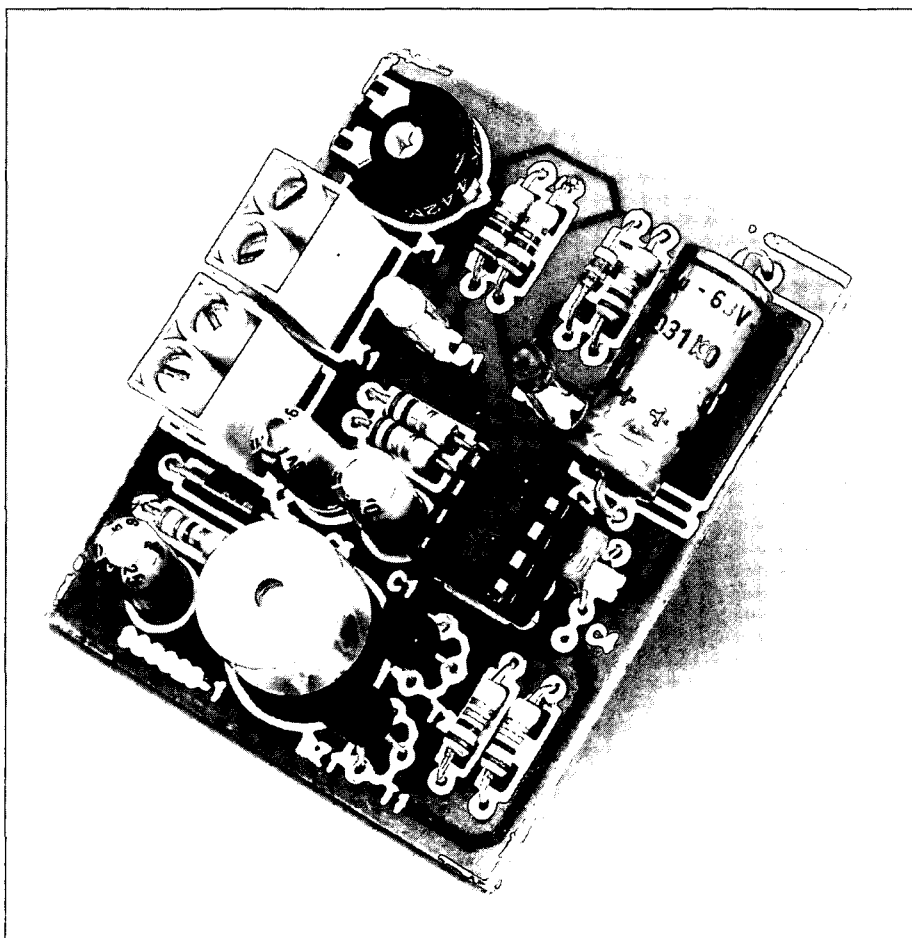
In spite of the compact size of the board, there is ample space for all components.
